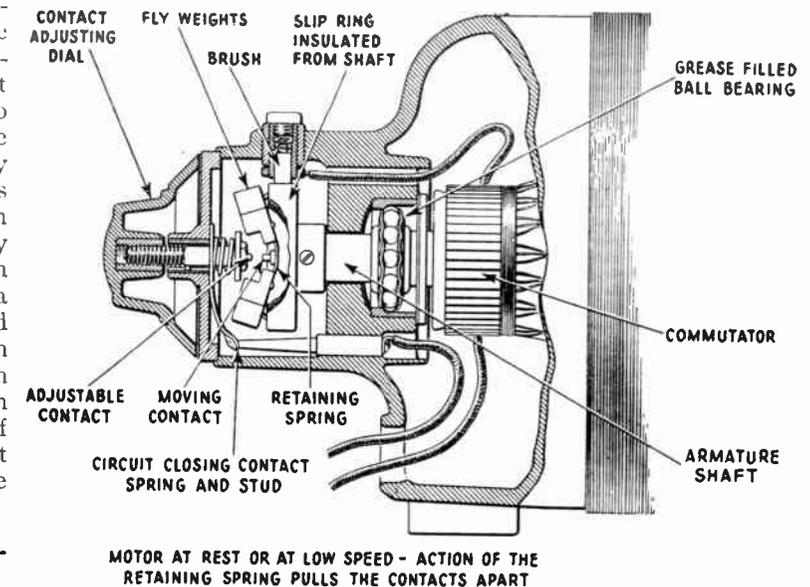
D.C. PROJECTOR DRIVING MOTOR (3).
